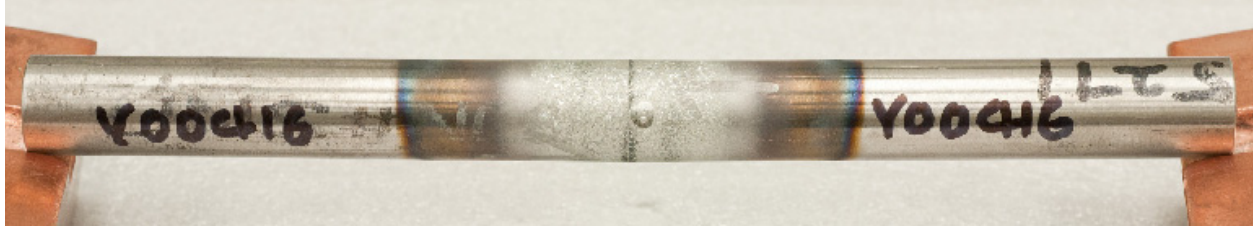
Diffusion welded sample of Alloy 800H.
